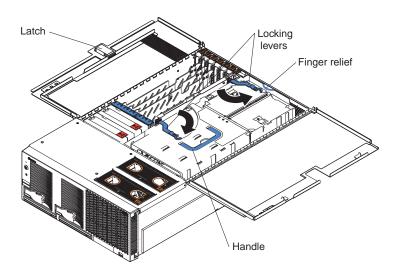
Rotate the locking levers to remove the SMP Expansion Module
